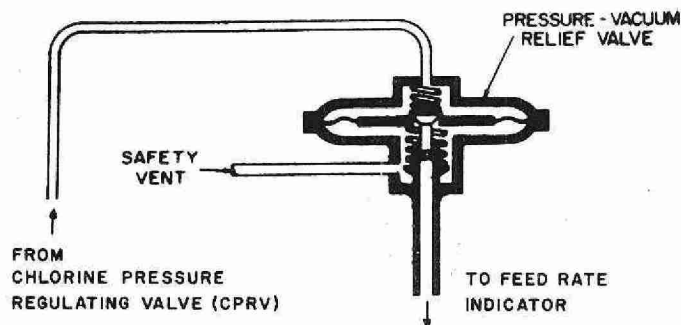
PRESSURE VACUUM RELIEF VALVE
